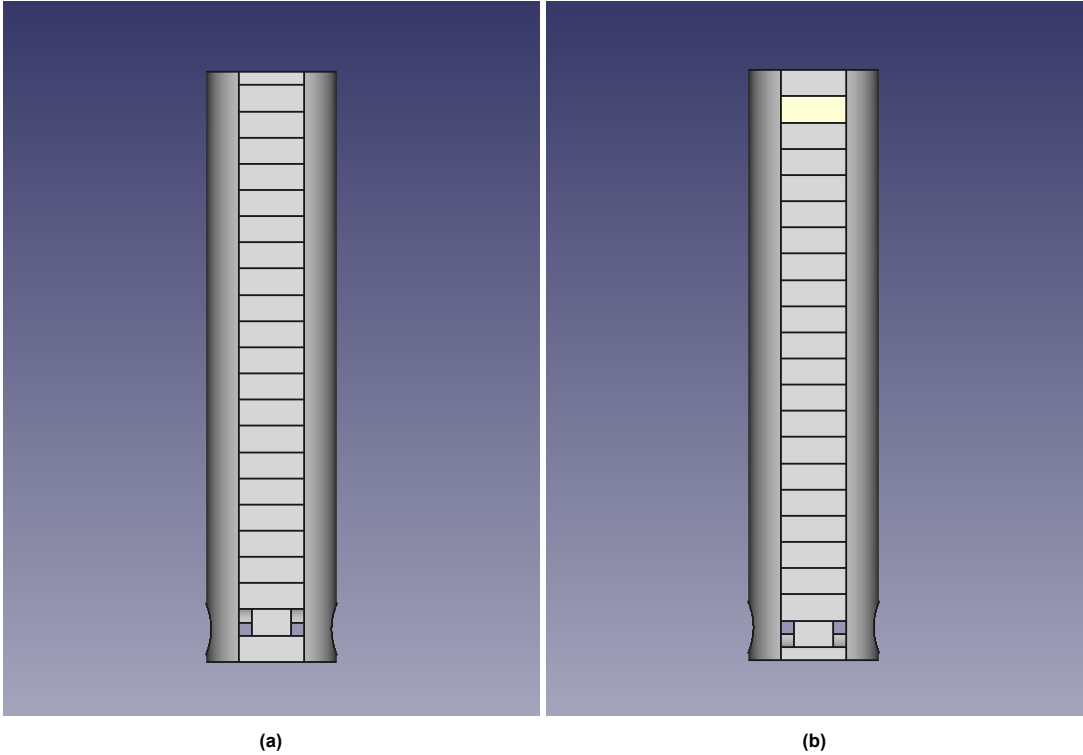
Inner cylinder staggered: (a) front view and (b) side view
